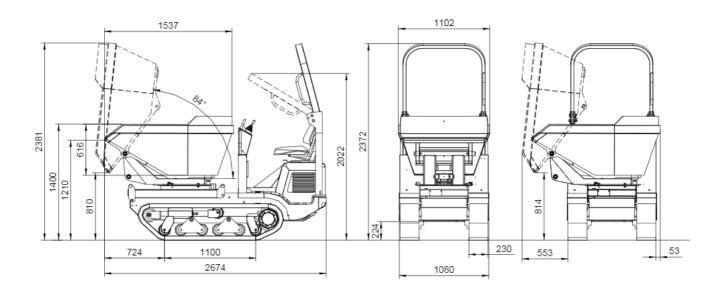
Machine dimensions (model DT15 with swivel skip)
